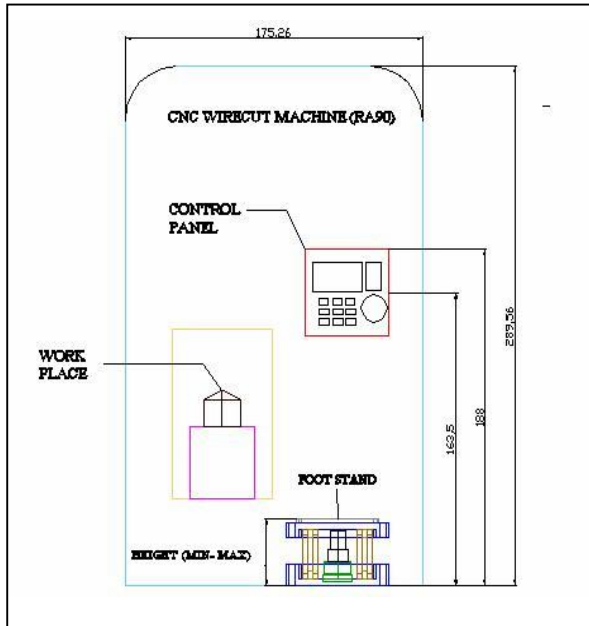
The CAD drawing of the machine with recommended foot stand in front view.
